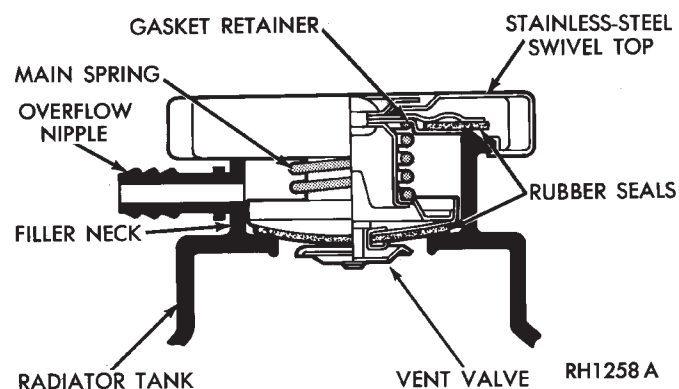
Radiator Pressure Cap and Filler Neck—Typical
